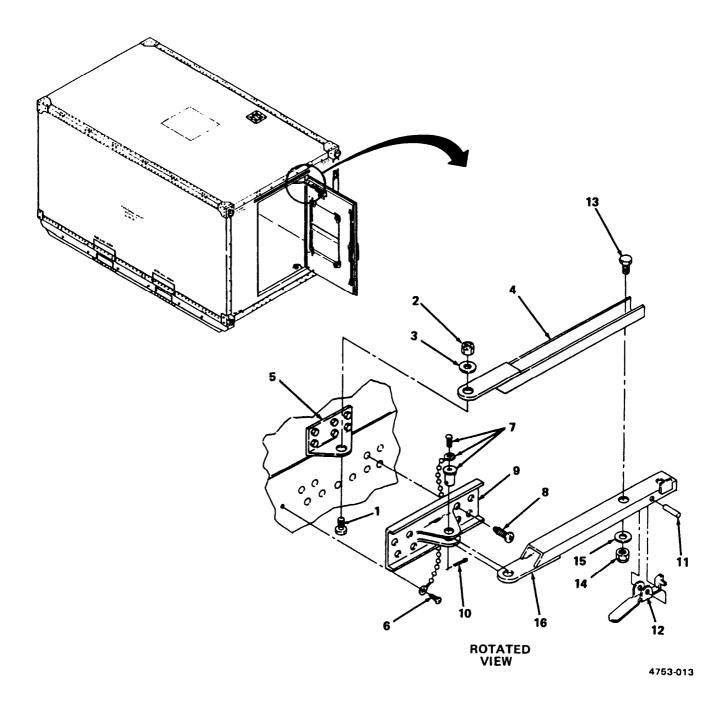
Door Brace Assembly Removal and Disassembly.
